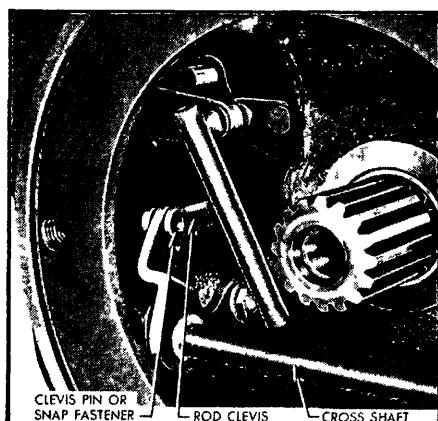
Valve operating rod clevis connected to cross shaft lever
